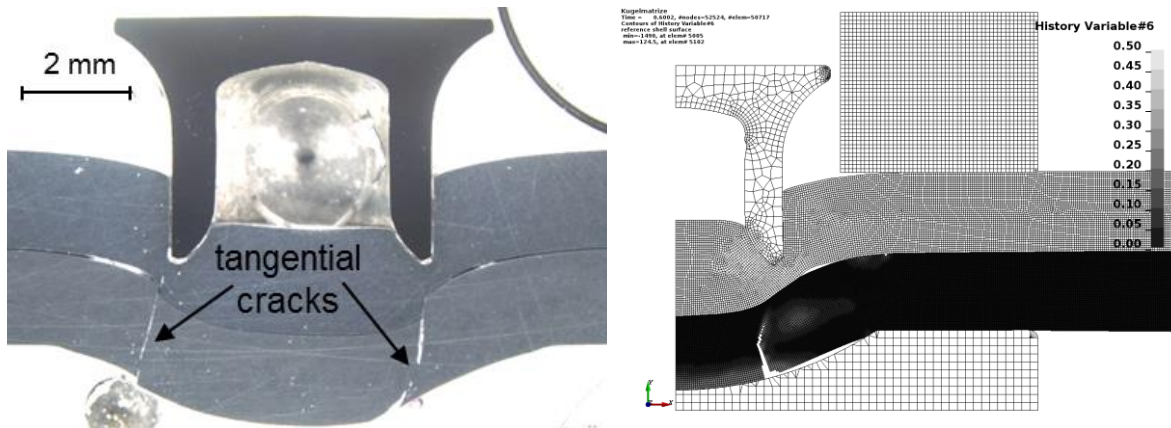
SPR joint with deep ball-shaped die. Left: Cross section showing tangential cracks, right: Damage values of the model in the aluminum die casting with crack at correct position.
